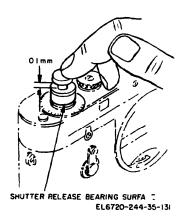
Gauge with center shaft 42-253.01-Z1L74.
